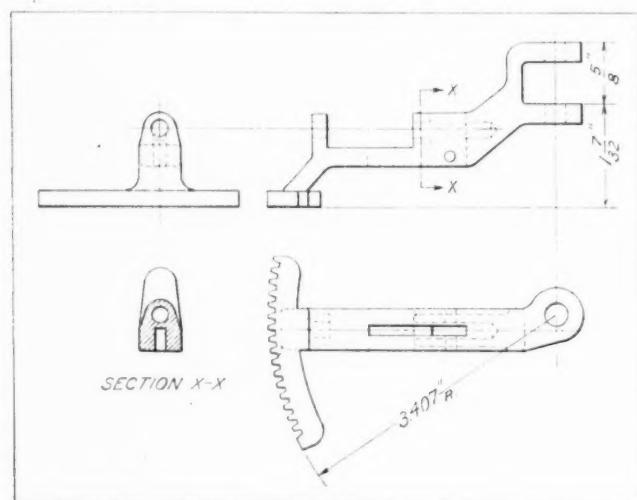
One of the Intricate Die-castings Assembled in Mechanism of Machine Shown in Fig. 1
